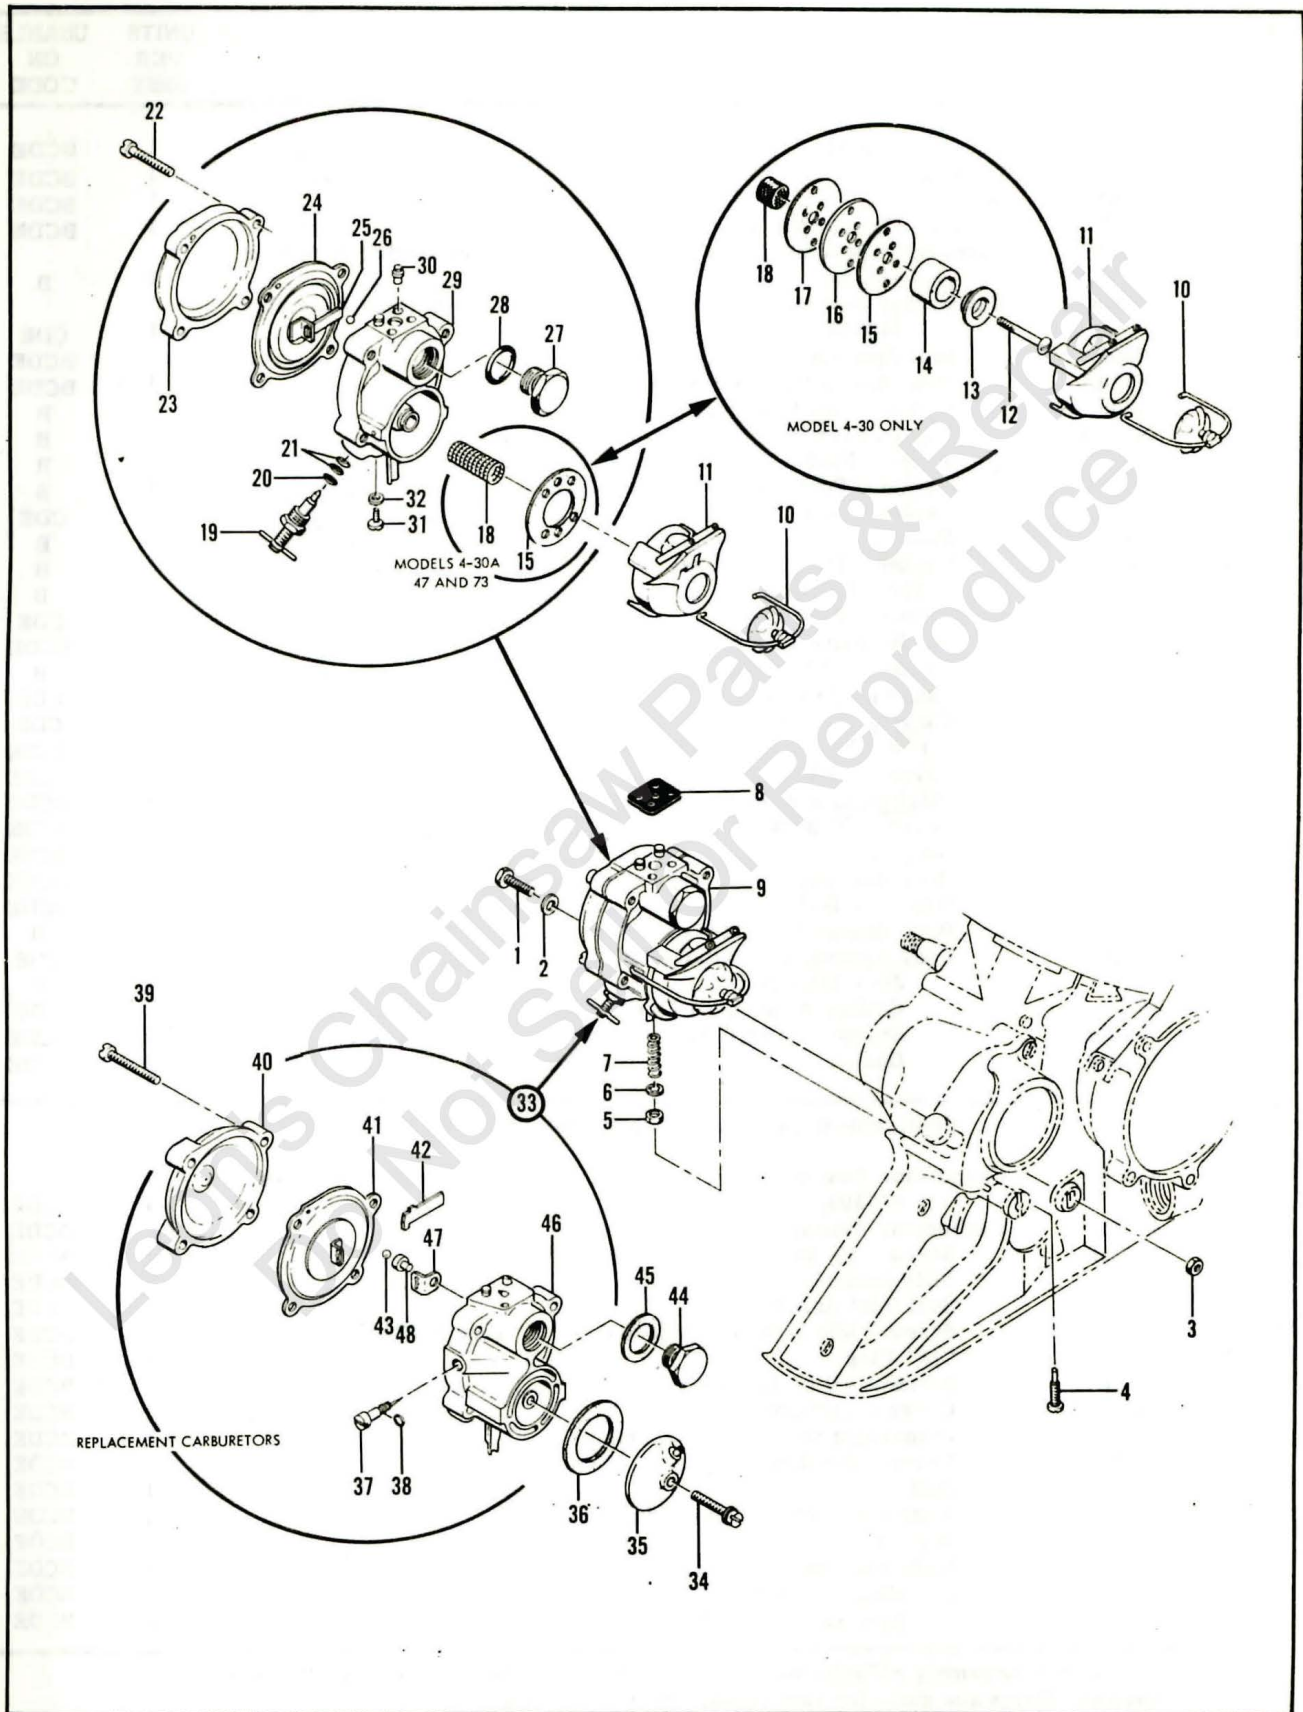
Model 4-30, 4-30A, 47 and 73 Carburetors
